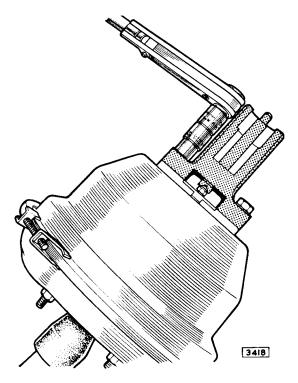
Setting the clearance before refitting the master cylinder using special tool, Tool No. J.26.
